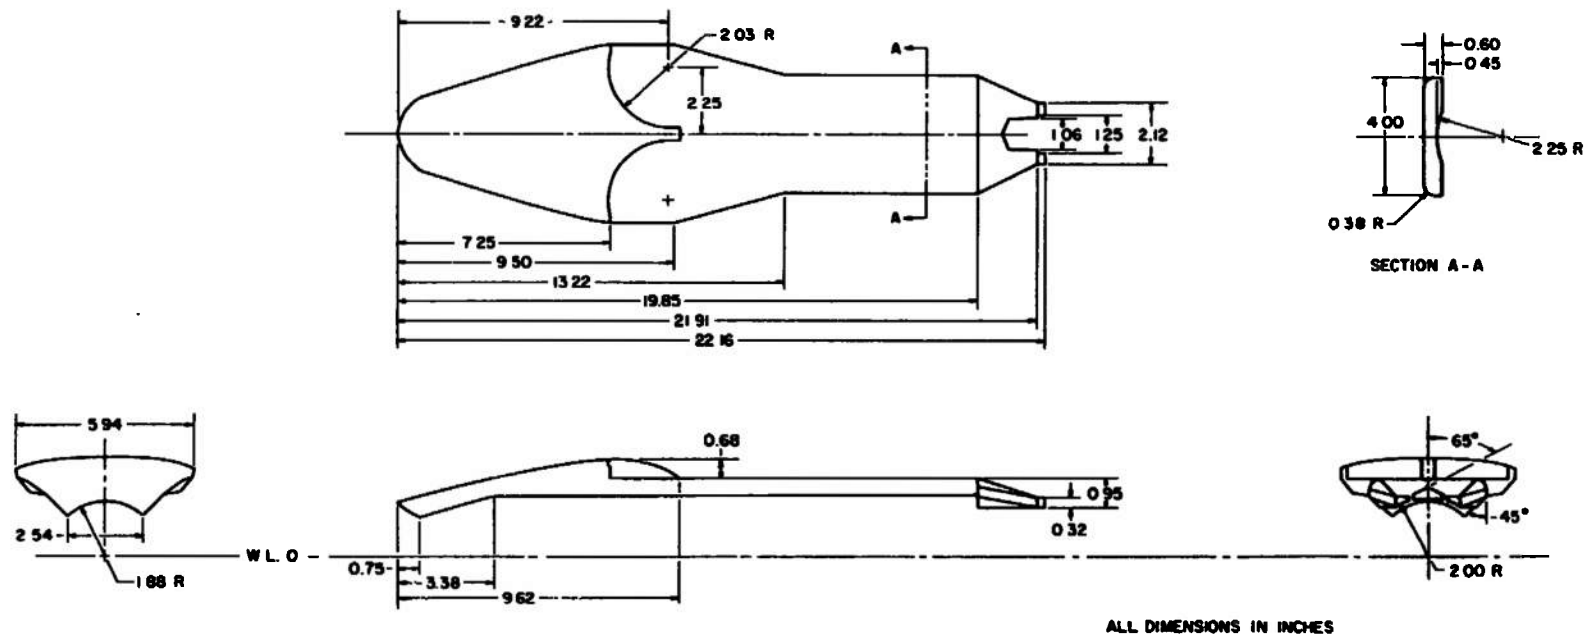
Dimensional Sketch of the Strongback Configuration (S1)
